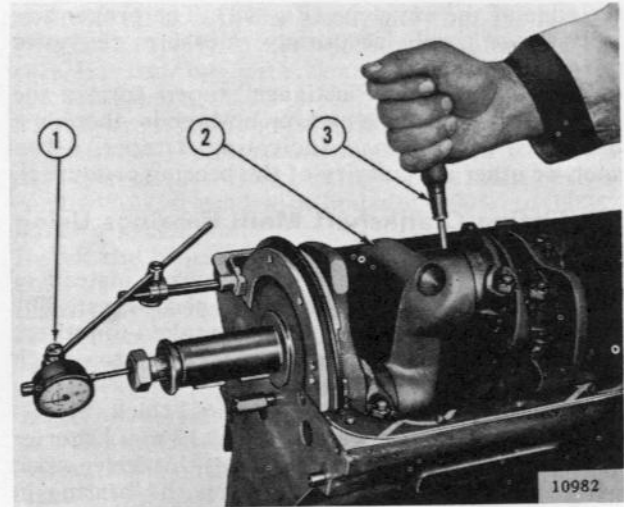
CHECKING CRANKSHAFT END-PLAY
